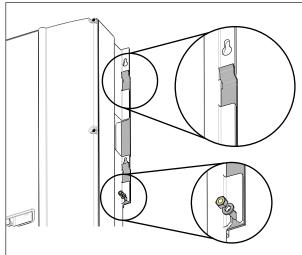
Hanging the solar power inverter on the mounting plate
